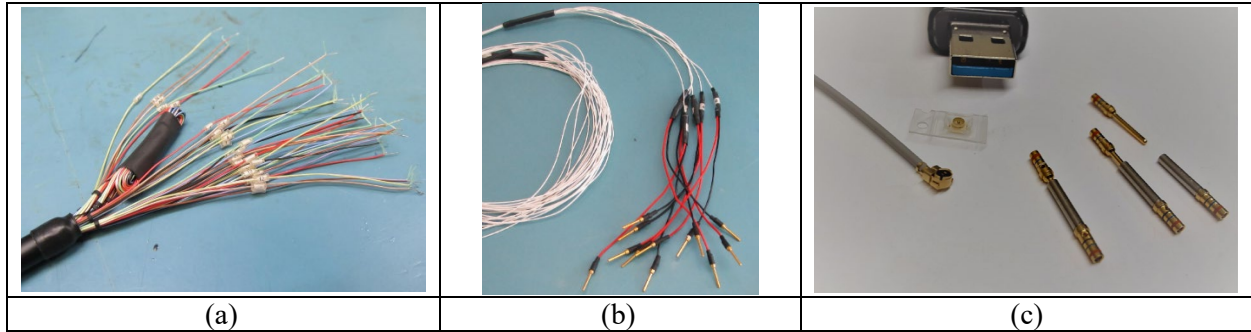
Cable for interfacing array probes with the ECA connector: (a) stripped wire ends; (b) pins attached to ends; (c) pins and μ BNC connection with PCB.
